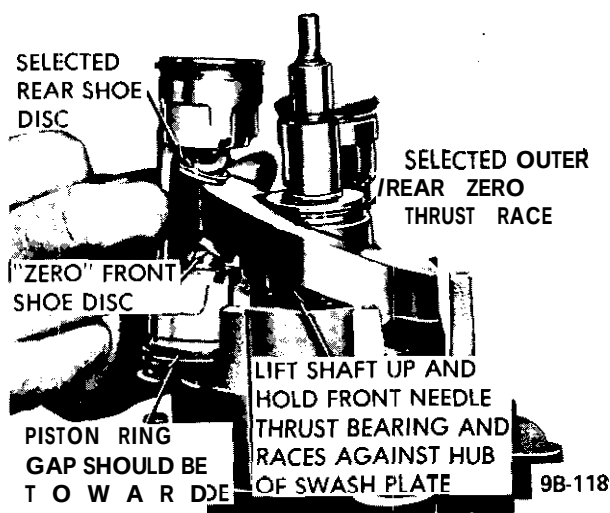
B-146 Installing Piston Assembly in Front Cylinder Half - Service Pistons Shown
